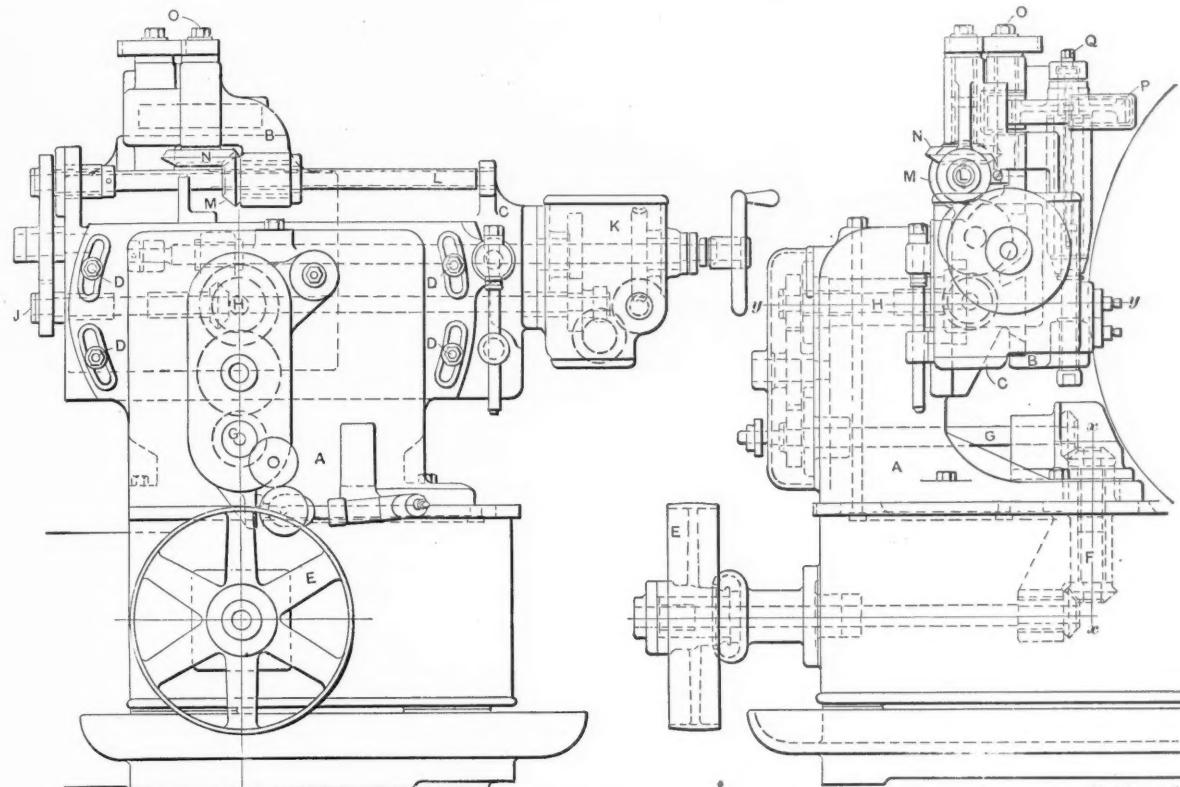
Front and Side Elevation of Cutter End of Machine, showing Cutter Slide Adjustments and Method of Driving.
